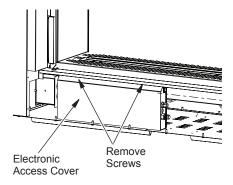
Removing Control Access Cover (Face Bottom not shown for Clarity)
